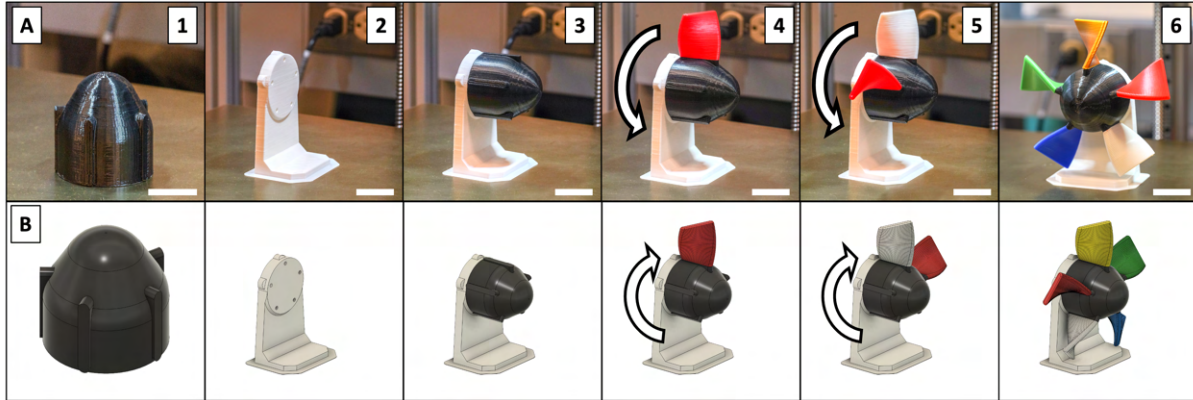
Fabrication of a turbine blade. A) The assembly steps for the turbine. 1) Print the core of turbine. 2) Print work-holding component. 3) Turbine core attached to the work-holding component. 4) First blade printed onto the turbine core. 5) Rotated by 72 degrees and printed second blade. 6) Final 5 fin design for turbine. (Above) photos of print. (Below) CAD rendering. B) Computer renderings of the procedure described in A.
